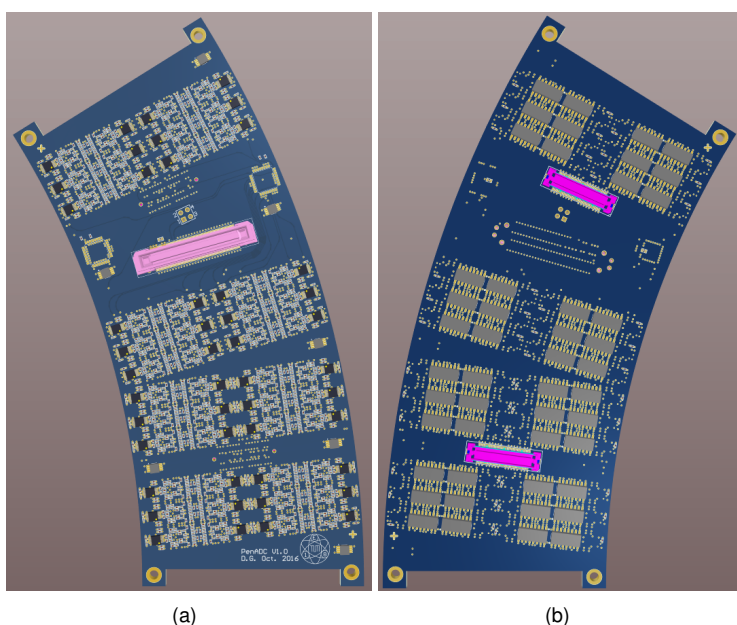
Picture of top (a) and bottom (b) side of the shaper and ADC board. The size is 123 x 196 millimeter.
